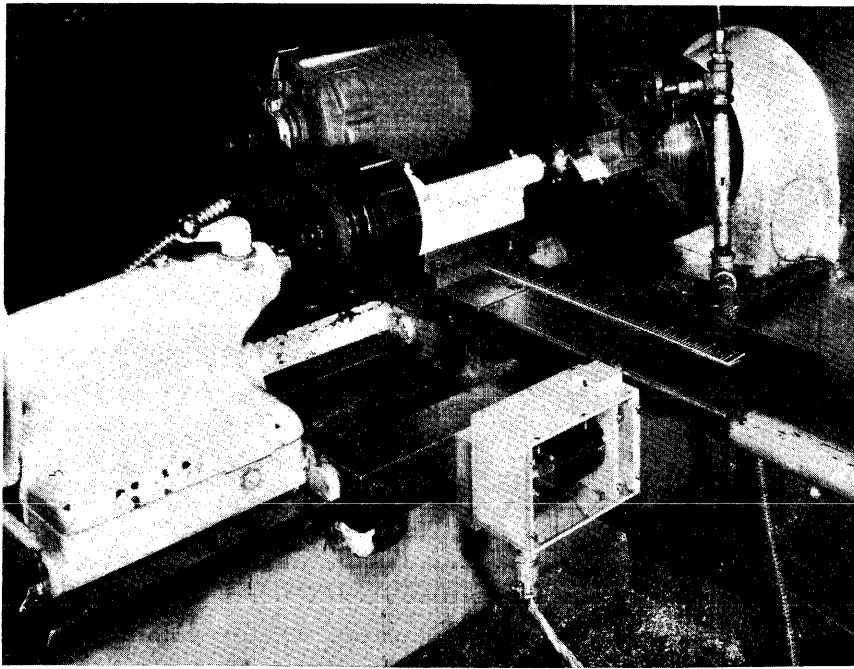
Adaptation Of A Motor Driven Milling Head To The Engine Lathe.
